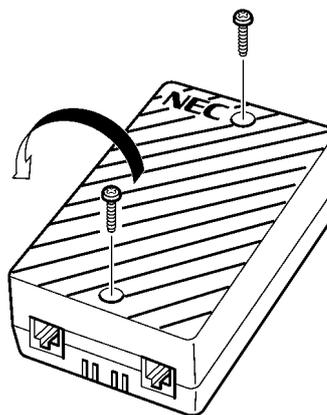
Removing the Screws from the SLT(1)-U13 ADP
